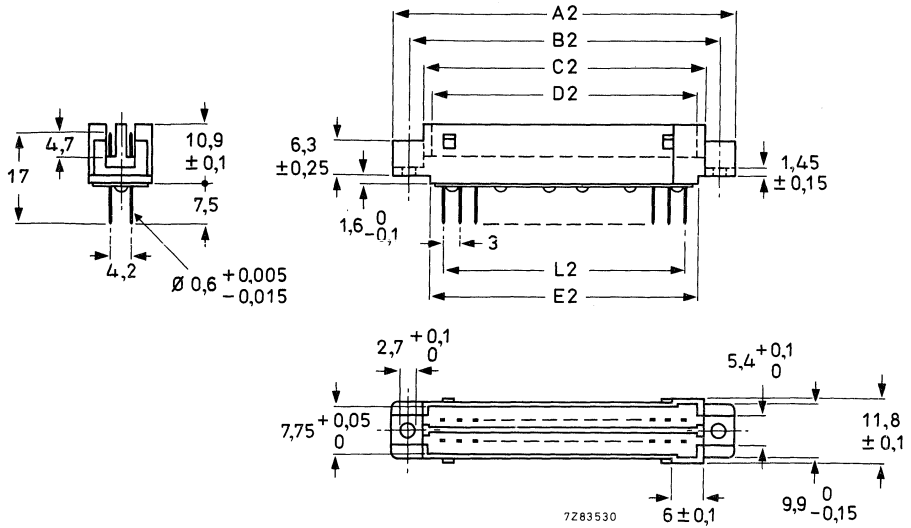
Male part with straight dip-solder pins; see Table 2 for dimensions A2, B2, C2, D2, E2 and L2.
